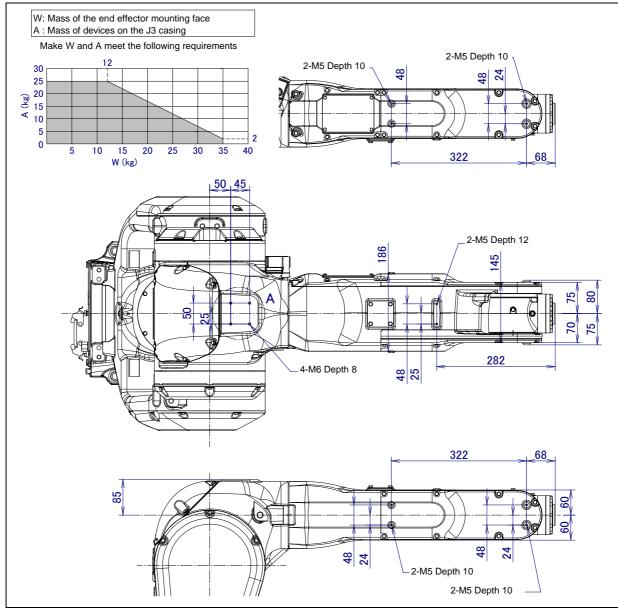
(d) Equipment mounting faces (3/3) (M-20iB/35S)
